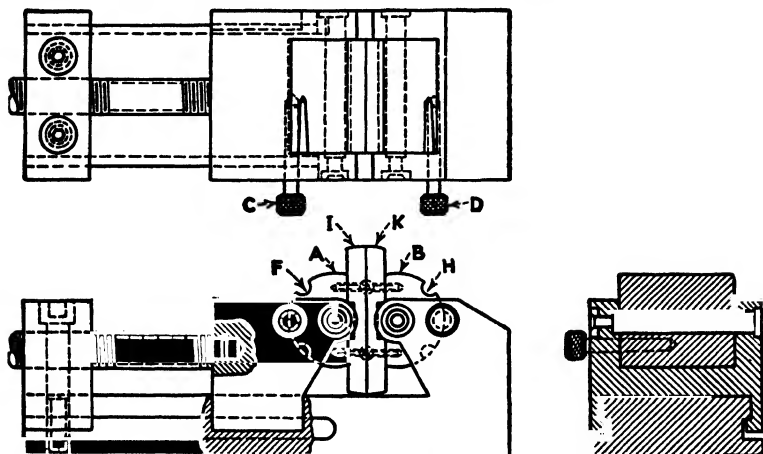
Auxiliary jaws are pivoted and bear in circular seats to relieve pins from undue pressure in clamping.
